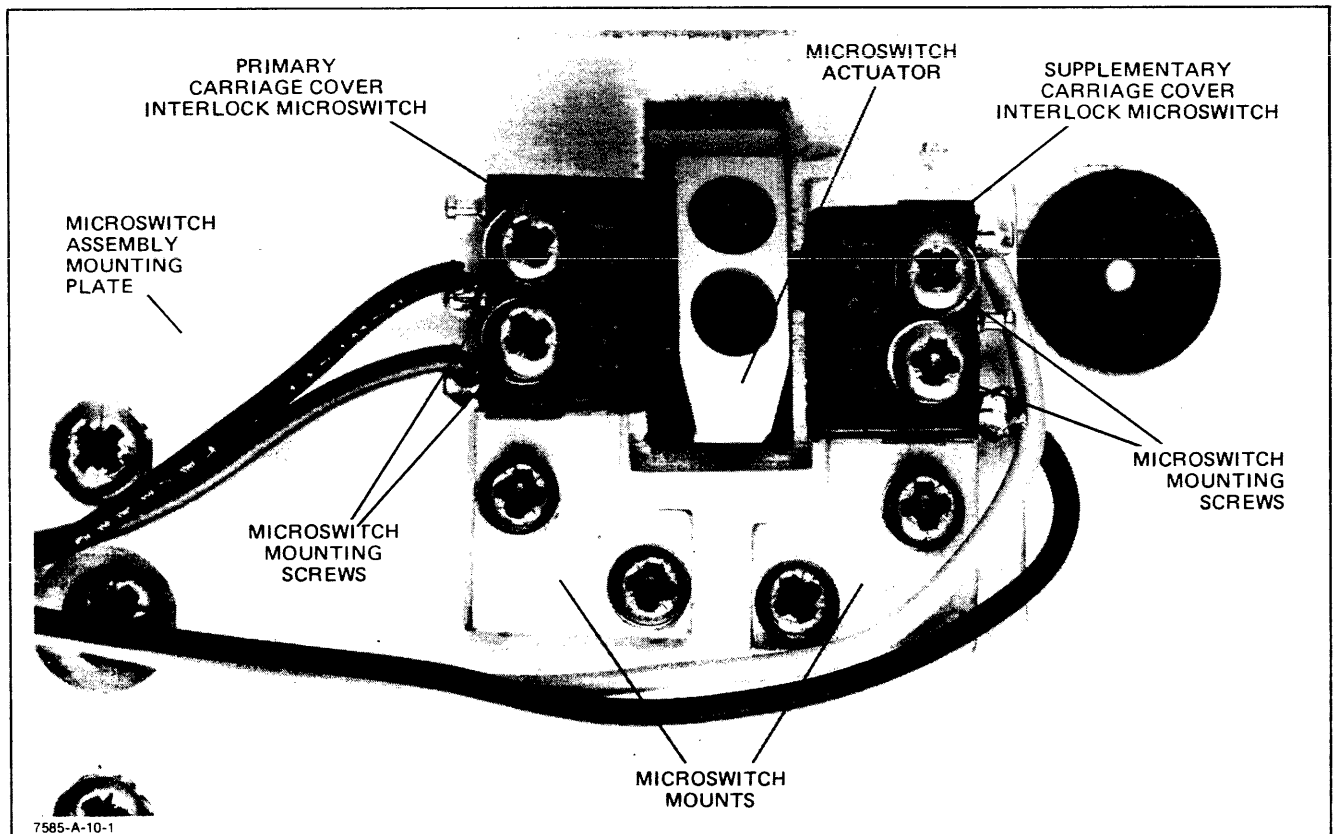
Carriage Cover Interlock Microswitches Adjustment
